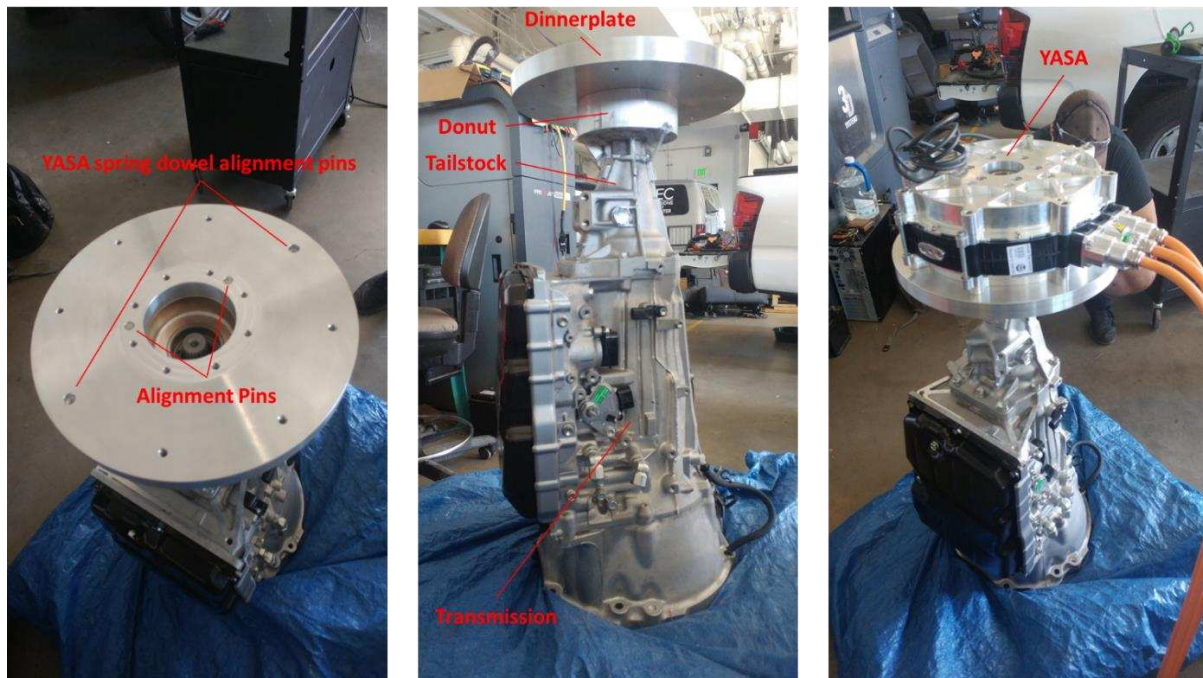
Assembly stack of Part D, A, I, YASA, and transmission
